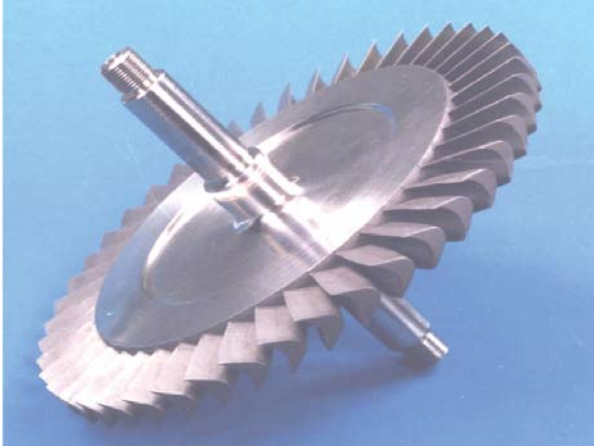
Finish machined HIPed stainless steel integral turbine rotor.
